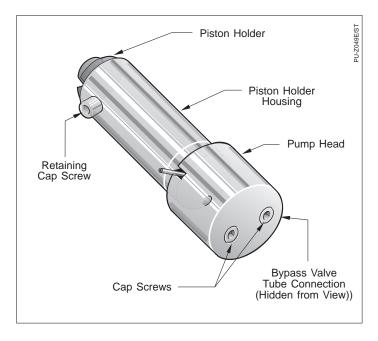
Installing the retaining cap screw (outlet liquid end)
